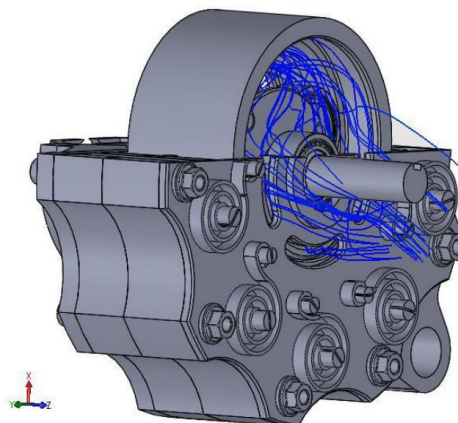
Air exhaust through the cylindrical piston and shaft.
